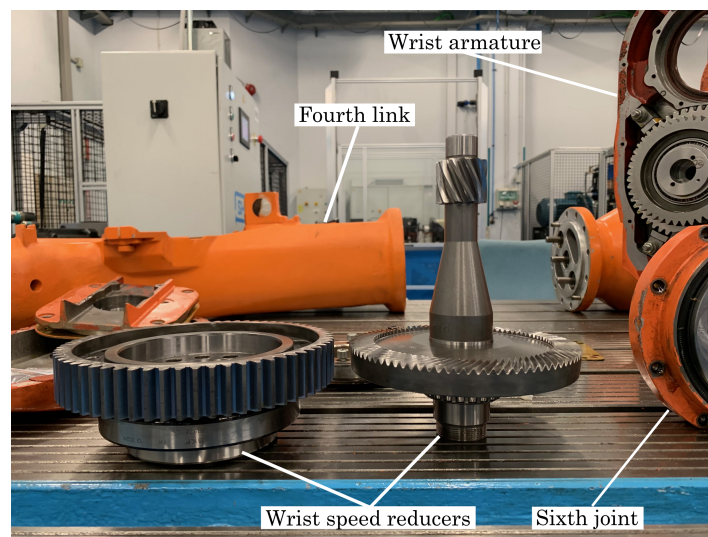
Mechanical inspection of the gears, bearings and motors of the wrist.
